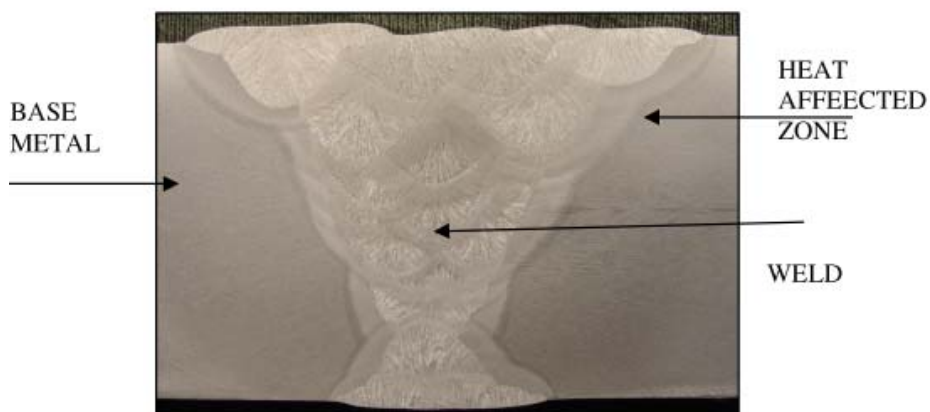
Weld Cross Section (Typical Macro)
